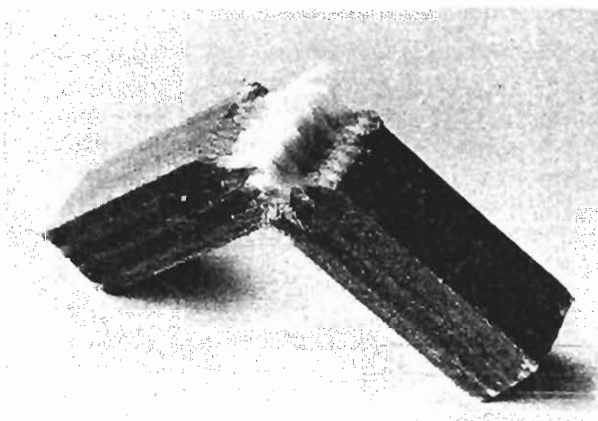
Fractured pultruded paper, wrapped glass and polyester composite.
